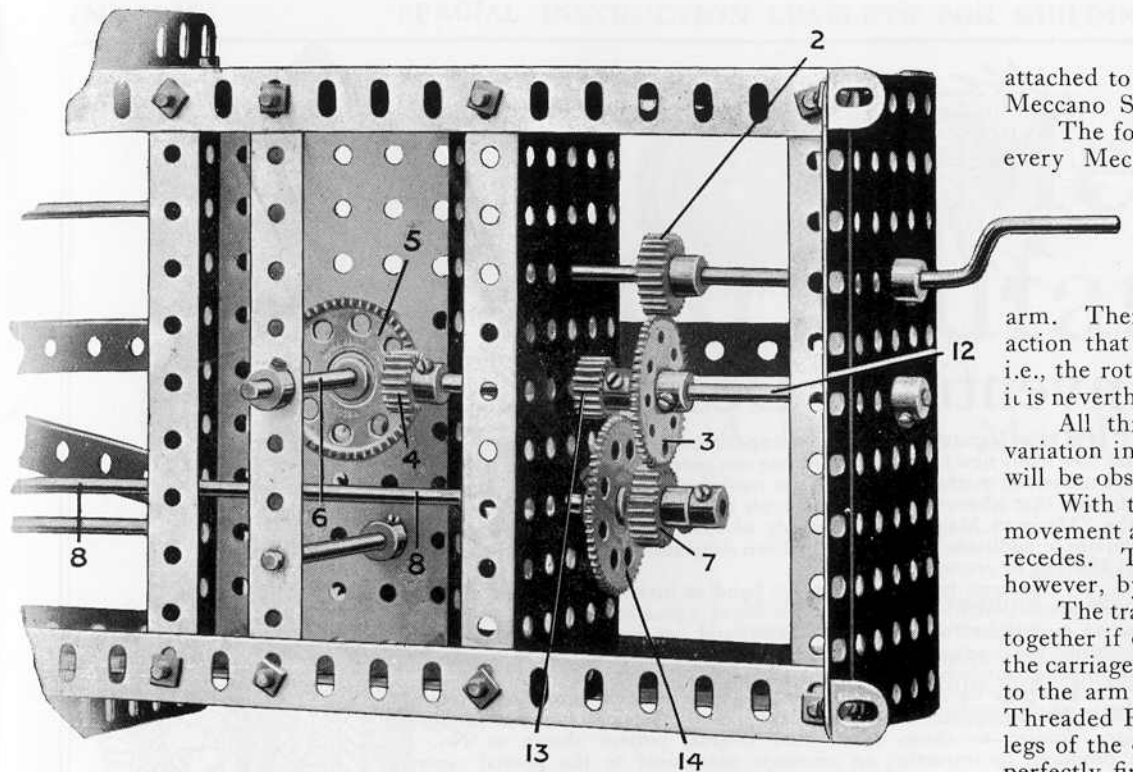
Plan view of Gear Box, showing drive to crown head, etc.
